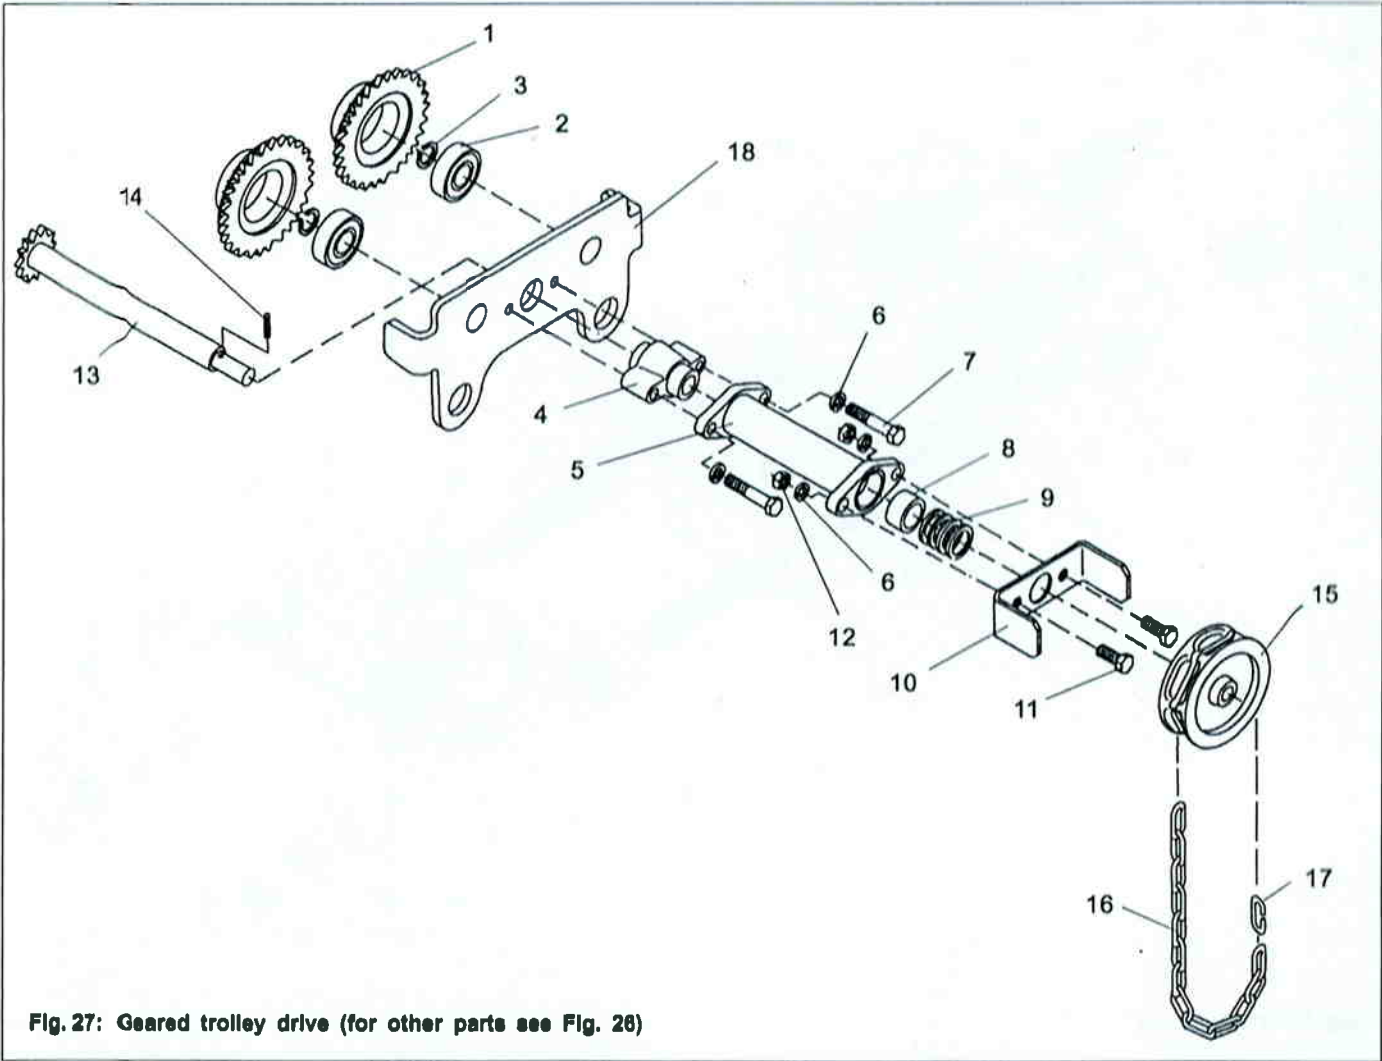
Geared trolley drive (for other parts see Fig. 26)
